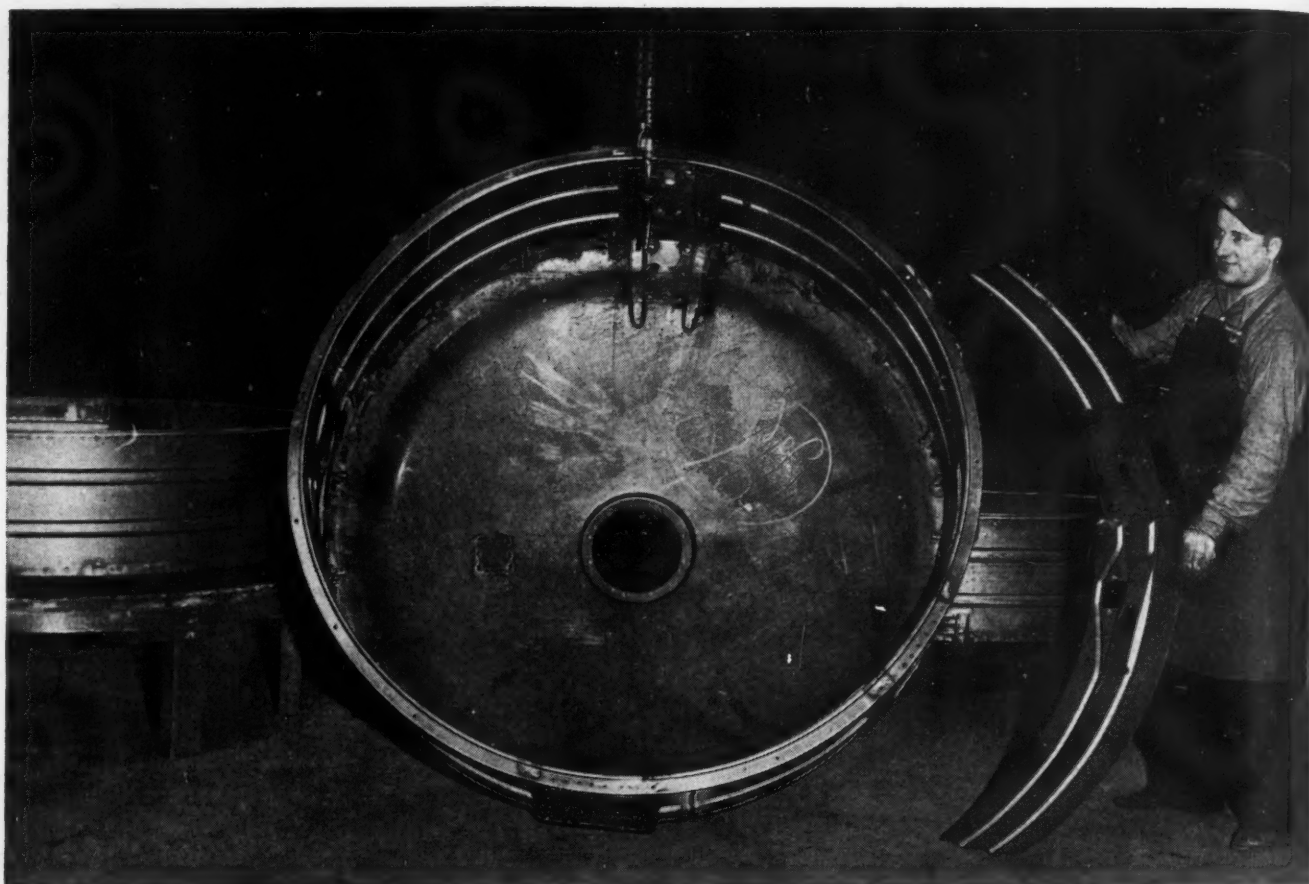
Drum assembly of searchlight is formed from simple parts which could be made in a one-hit operation and required no annealing procedures
